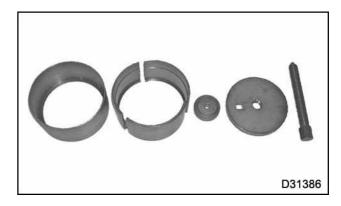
Crankshaft Rear Wear Sleeve Remover ZTSE4518
